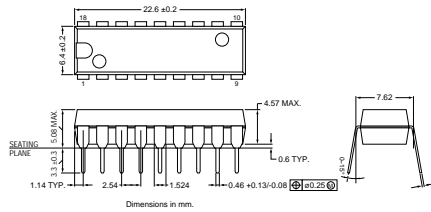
MSM66P54 Mechanical Drawing (DIP20-P-300-W1 Package)
